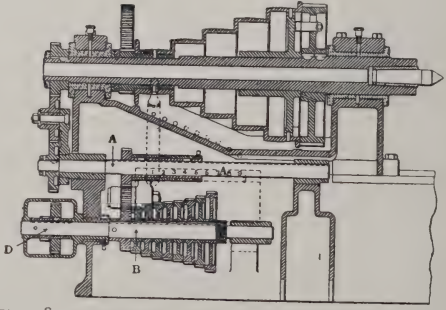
HEADSTOCK, SECTION SHOWING CHANGE-GEAR.
